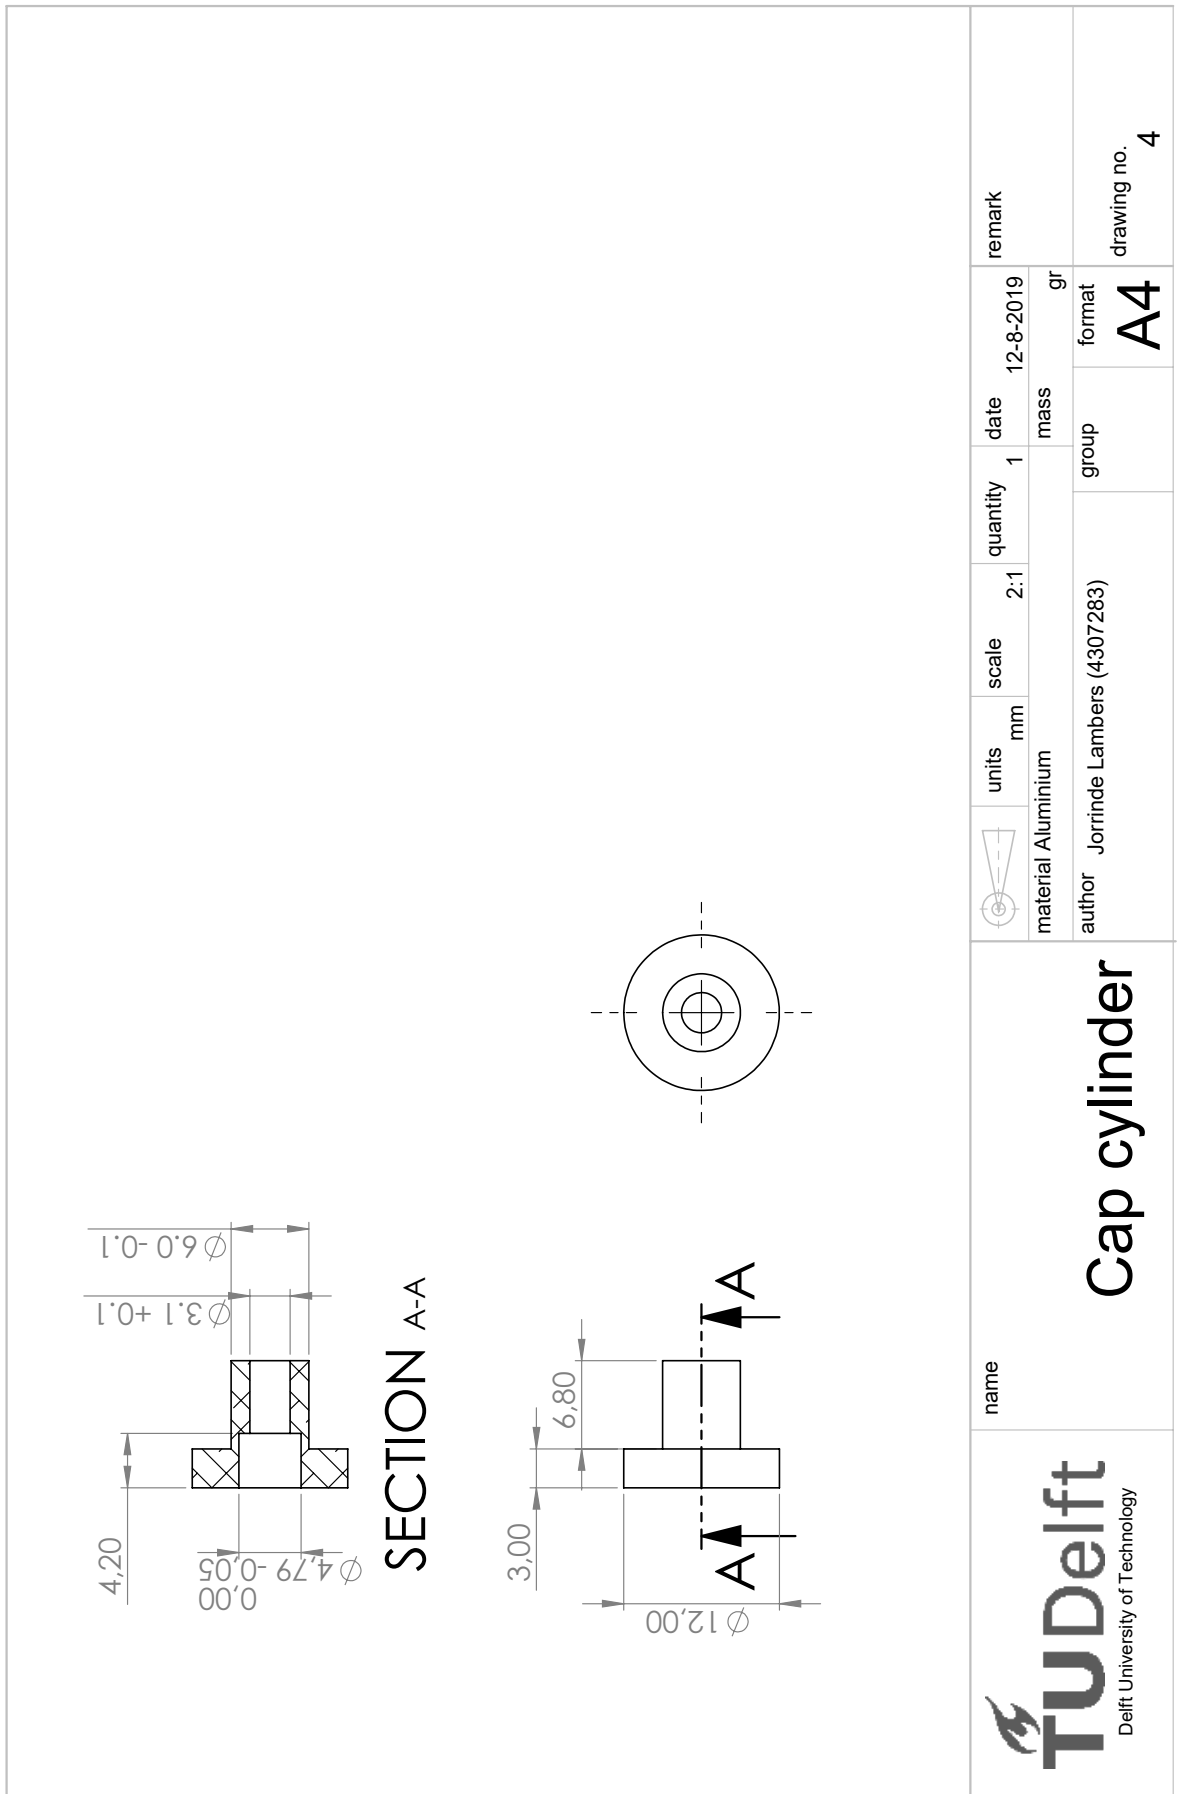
SolidWorks drawing of component number 4: Cap cylinder.
